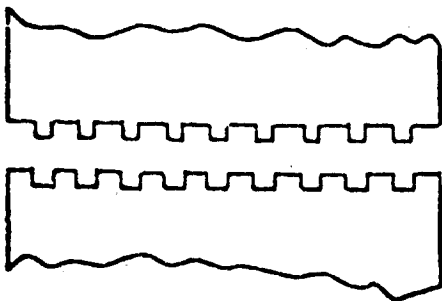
Protrusions on upper bonding head aligning grooves on lower bonding head.
